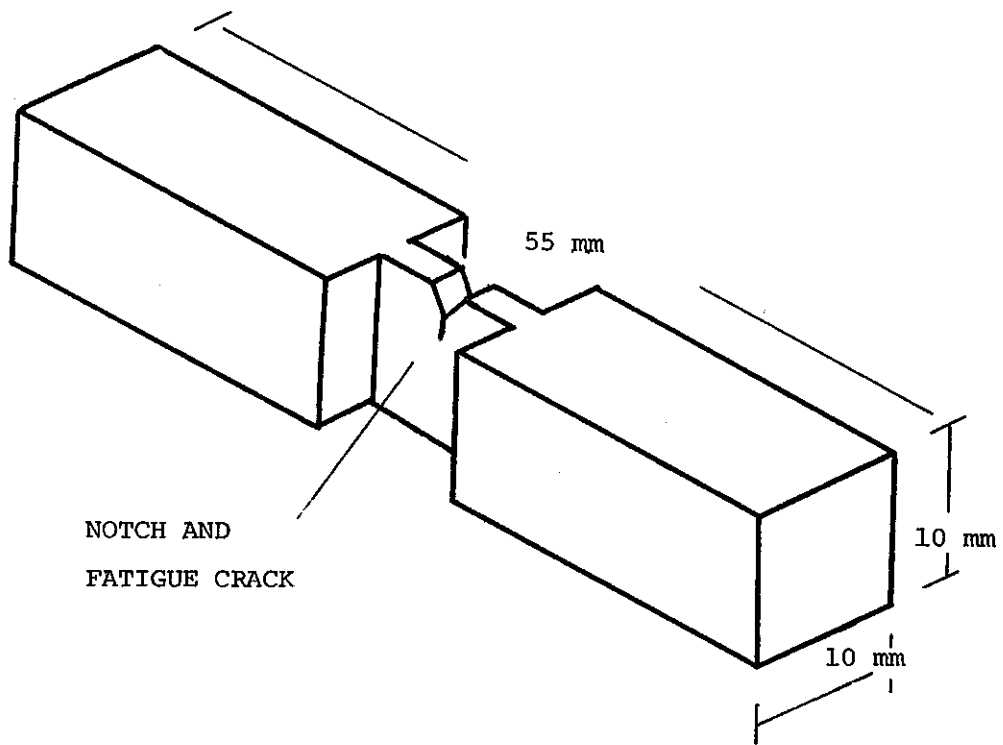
FRACTURE TOUGHNESS TEST SPECIMEN
